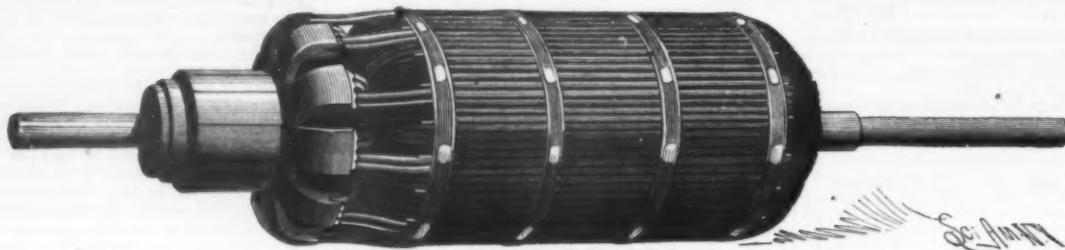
PERSPECTIVE VIEW OF ARMATURE.
